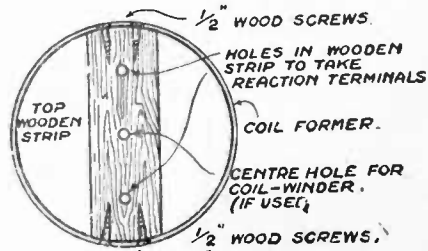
A top view of the coil showing how the top terminal strip is fitted.
